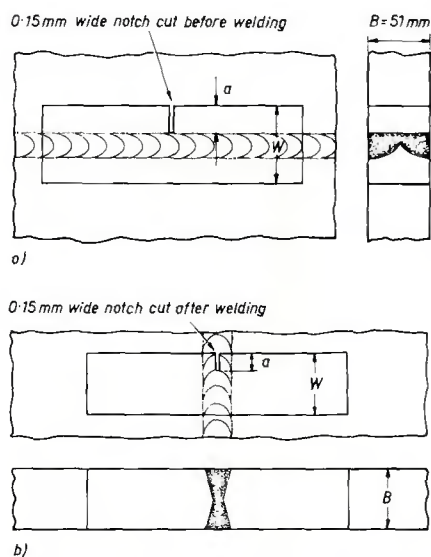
Orientation of COD test specimens (relevant to wide plate tests)
